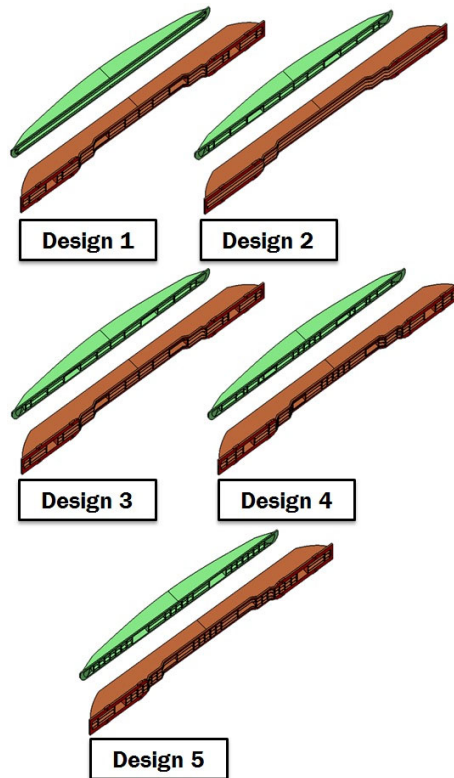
Design alternatives of bumper back-beam according to the rib formation
